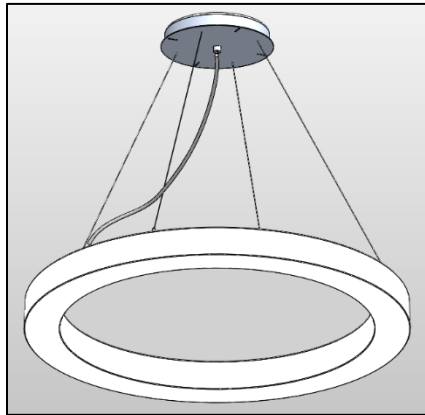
COMPLETED INSTALLATION OF GLOWRING PENDANT WITH P1DB HANGING SYSTEM GL1 (GLOWRING) (SHOWN)
